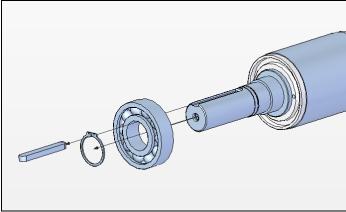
Replacing bearings on MDD motors (steps 6 and 7)
